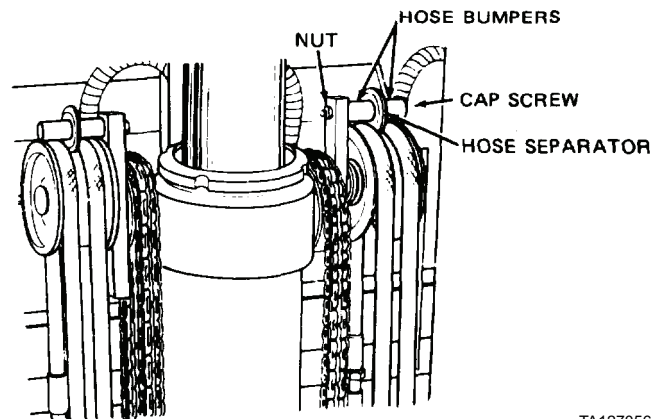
Hydraulic Hoses, Lines, and Fittings.
